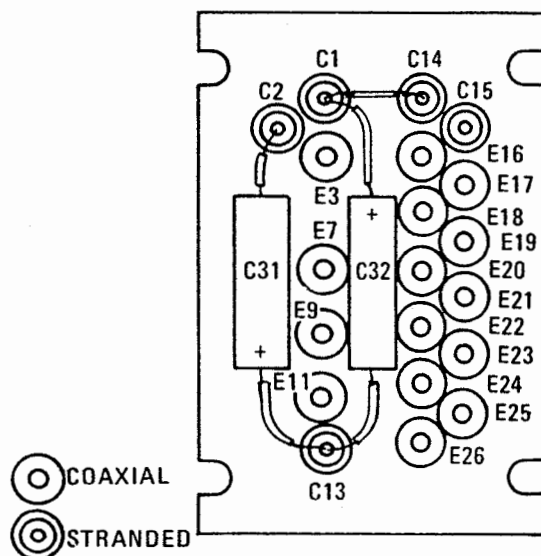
Filter Plate Assembly, A2A10FL1 Component Location
